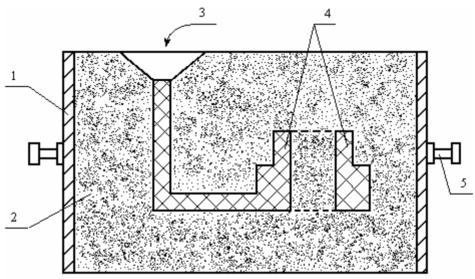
Single-piece mould with expanded polystyrene pattern: 1 – flask; 2 – sand mix; 3 – molten metal; 4 – pattern of expanded polystyrene (polyfoam); 5 – necks
